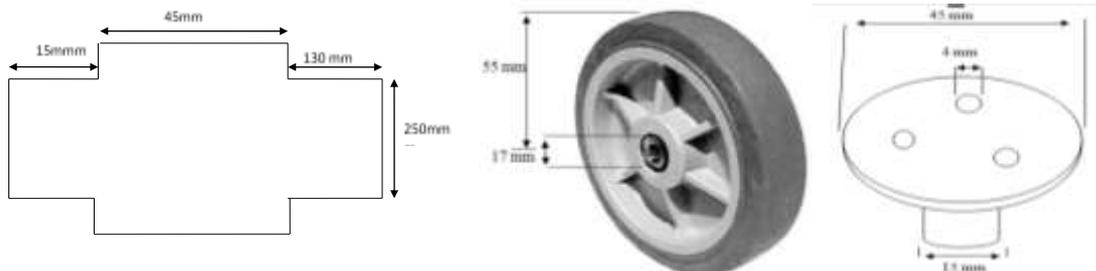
Dimension of the Base of the Robot; Robot’s Heavy-Duty Drive wheel (4.3-inch Diameter); and Camera Mounting Base
